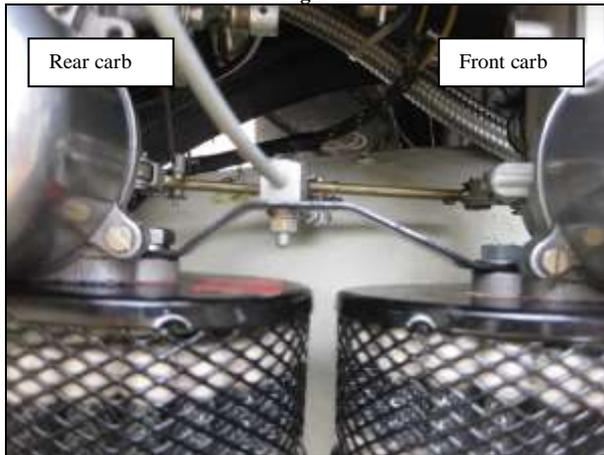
shows the choke cable bracket as originally fitted, supposedly correctly. This prevented full choke operation and also put a side load on the front carburettor jet preventing smooth needle movement. Hence the splutter on start up as only one carburettor was on choke and the other carburettor, the needle was tight due to the side load being applied to the jet.
